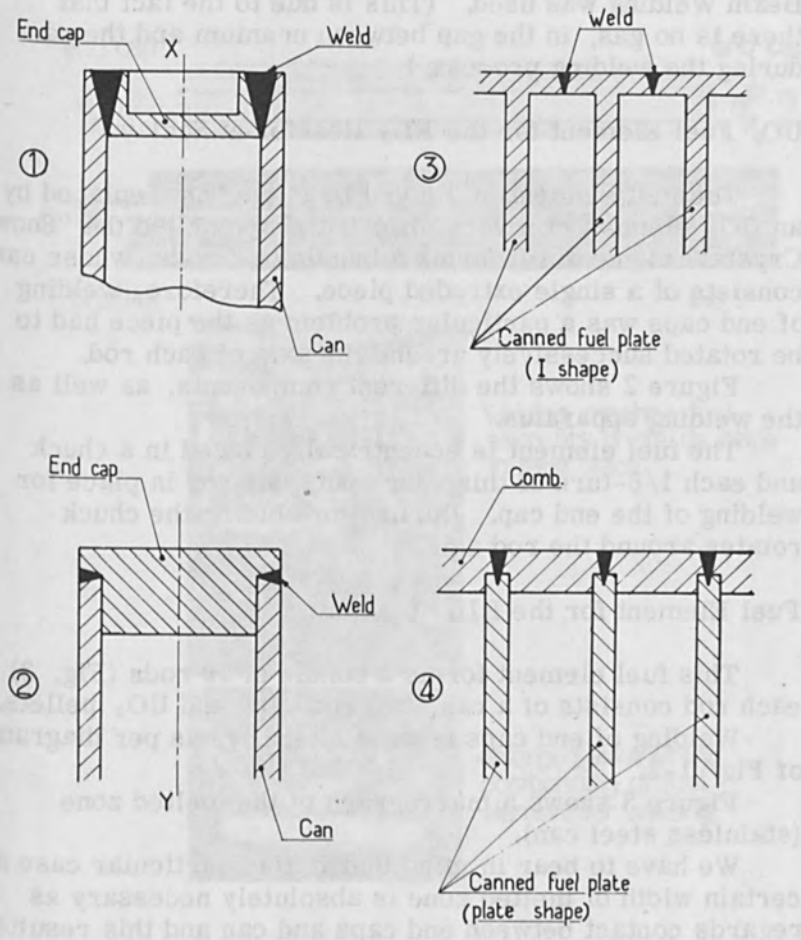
Some examples of welds used in fuel elements fabrication
